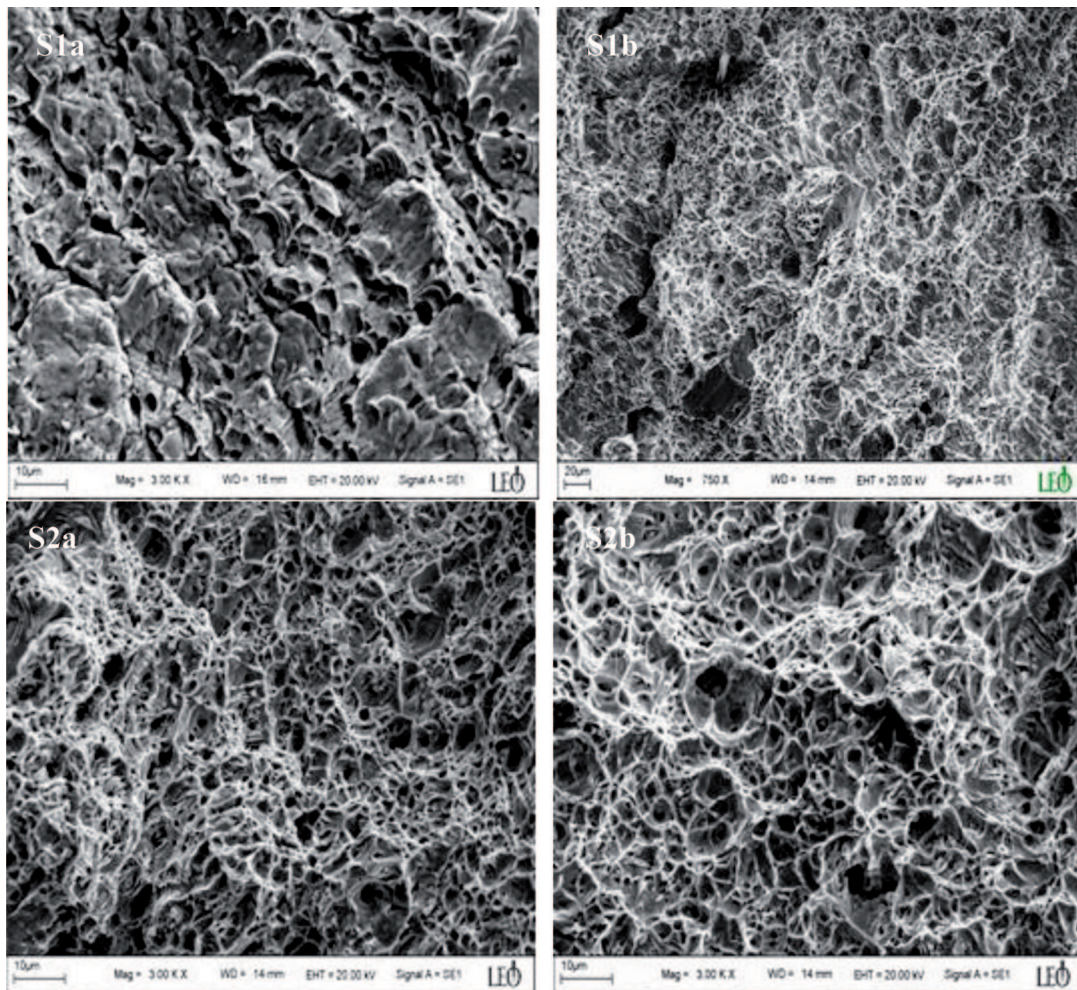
Fracture surfaces of tensile tested specimens of S1 and S2 joints
